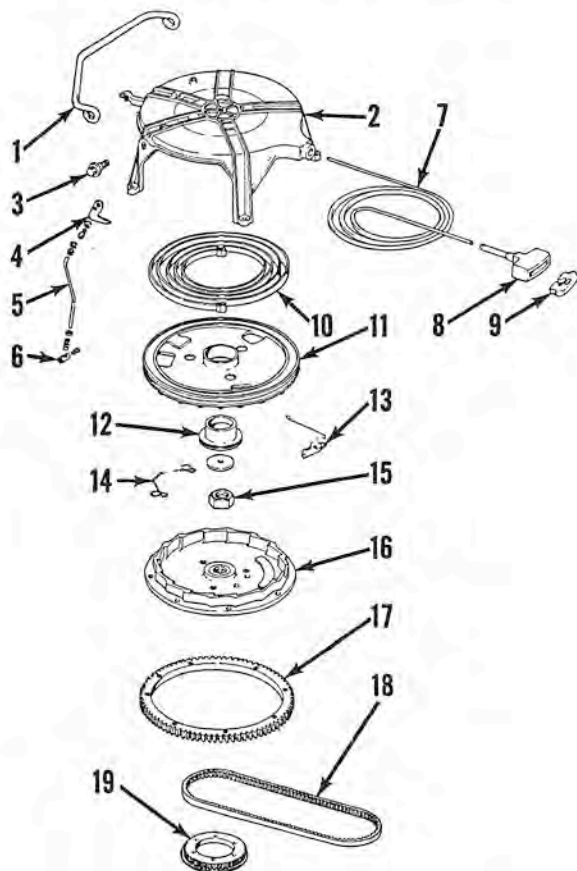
Exploded view of typical manual starter used on models not equipped with alternator.
